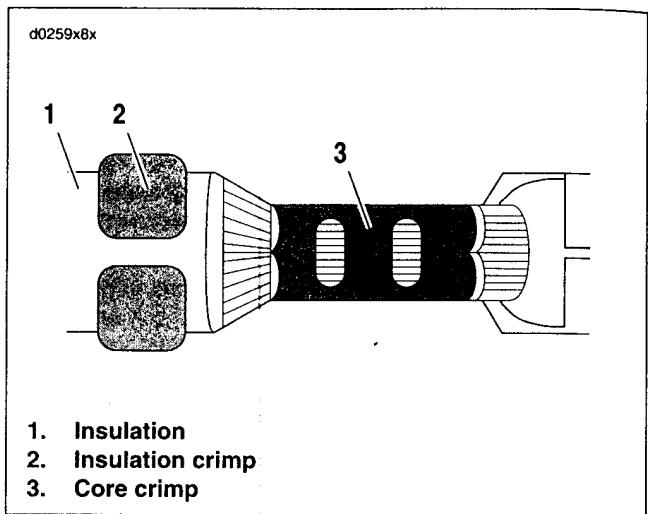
Inspect Core and Insulation/Seal Crimps
